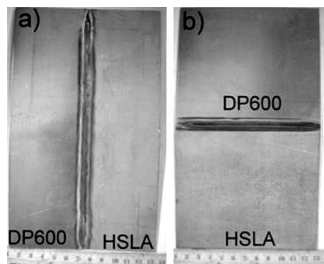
Laser welded blanks fabricated with different weld orientations for plane strain stretch forming tests: (a) longitudinal weld and (b) transverse weld
